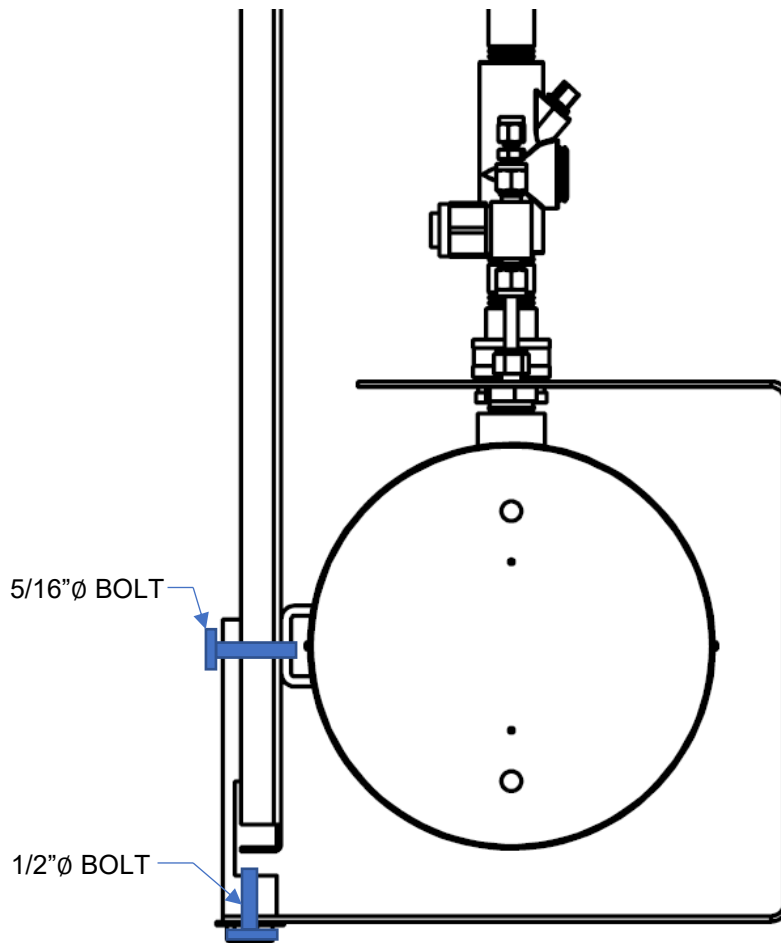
Detail illustration of Total Sulfur Furnace Guard assembly
